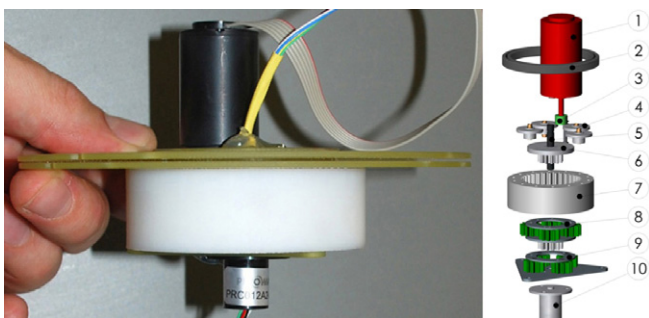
Roombots' gearbox design. A brushed motor (1) drives an initial drive-chain of spur gears (3–5). A second set of planetary gears (6–9) increases the available torque further. A slip ring (10) provides power and communication at continuous joint rotation.
